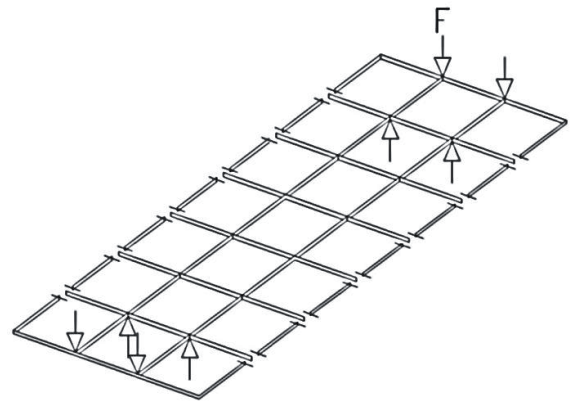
Lattice structure with S_1S_2 load and 8 crossmembers
